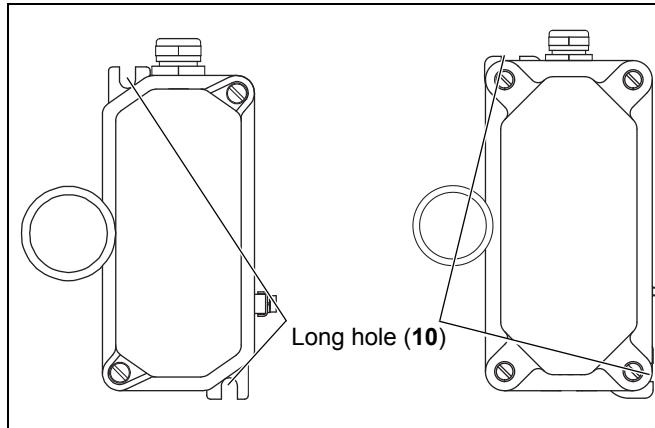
Mounting the belt misalignment switch onto the conveyor
